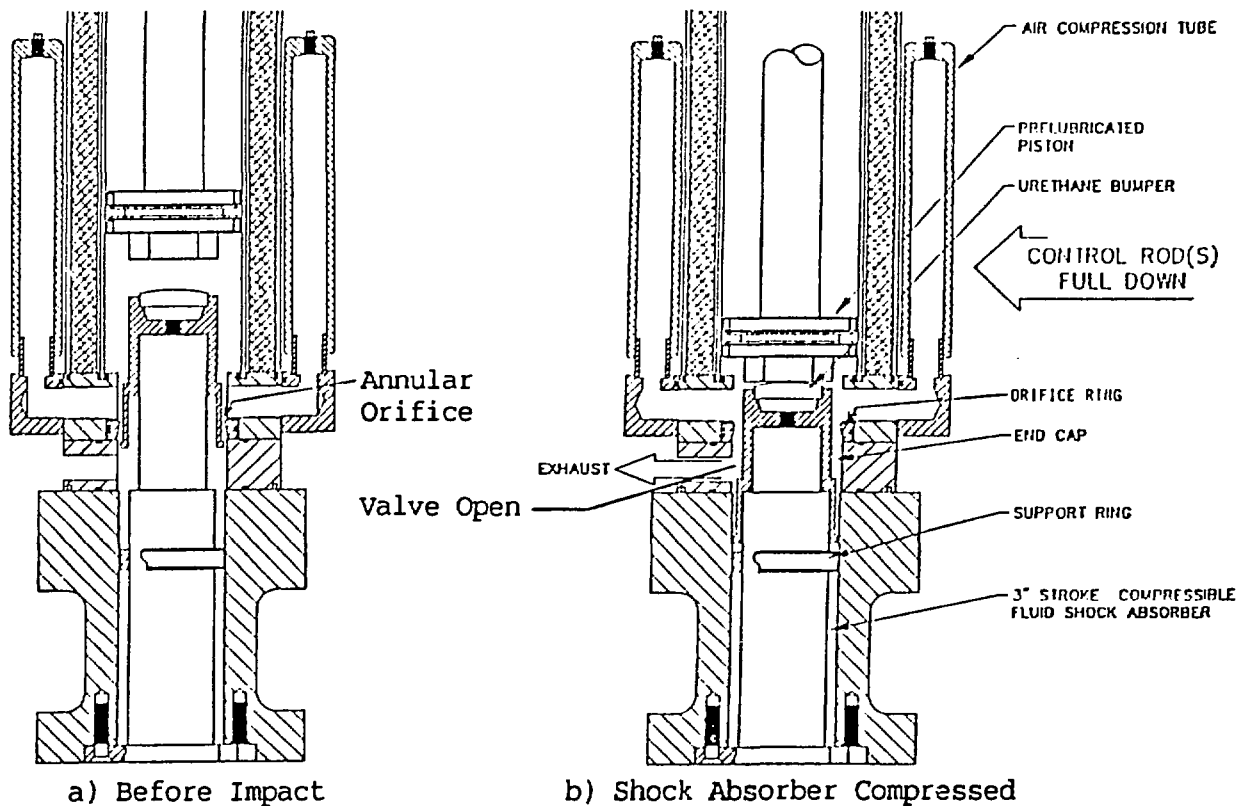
Refurbished Air Cylinder-Lower Assembly
